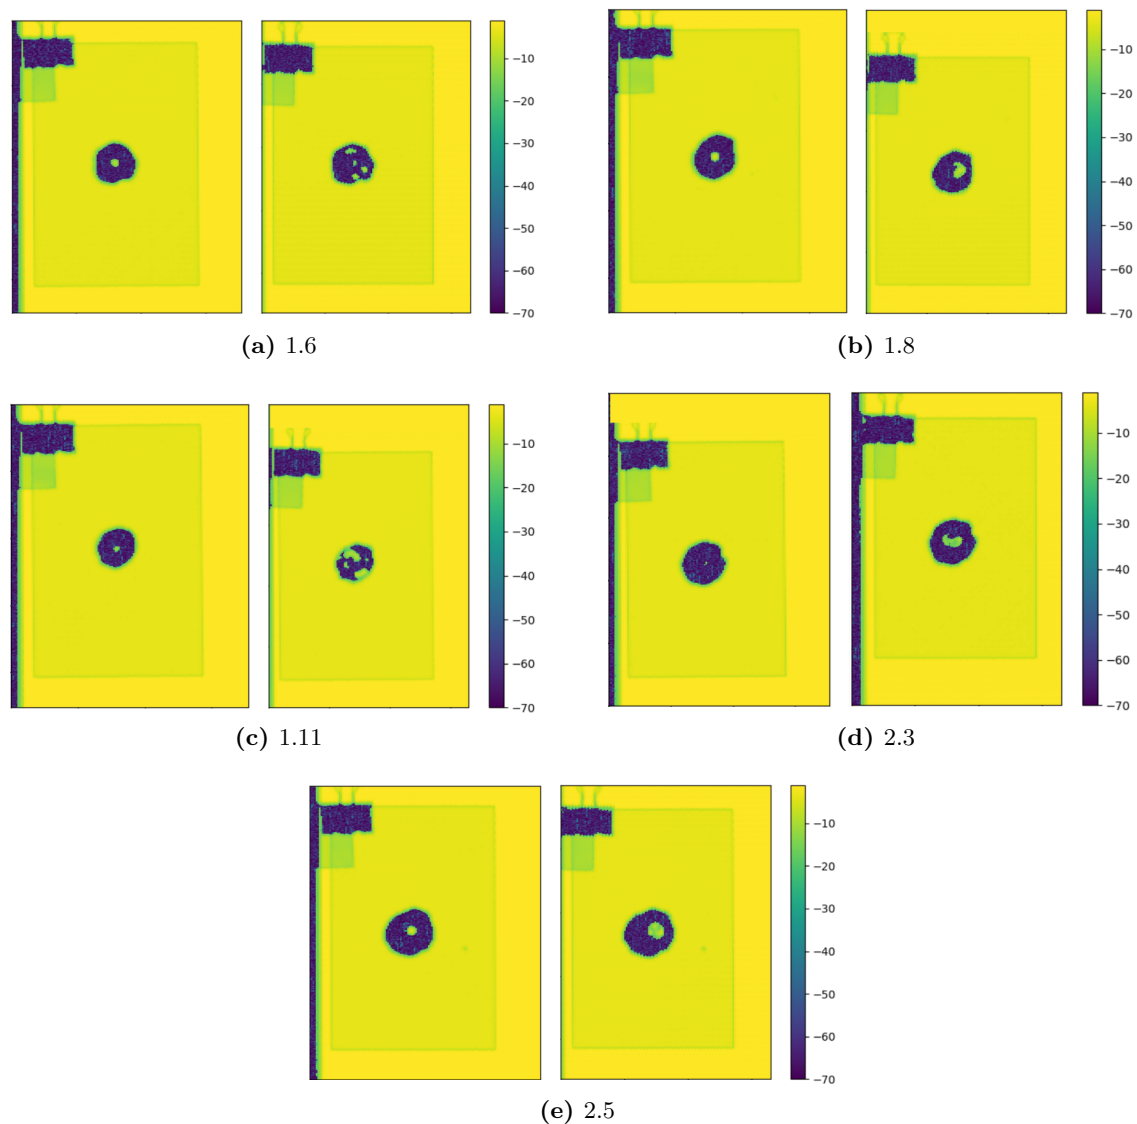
C-scans of all repaired specimens with clamping A. Left: before welding. Right: after welding.
